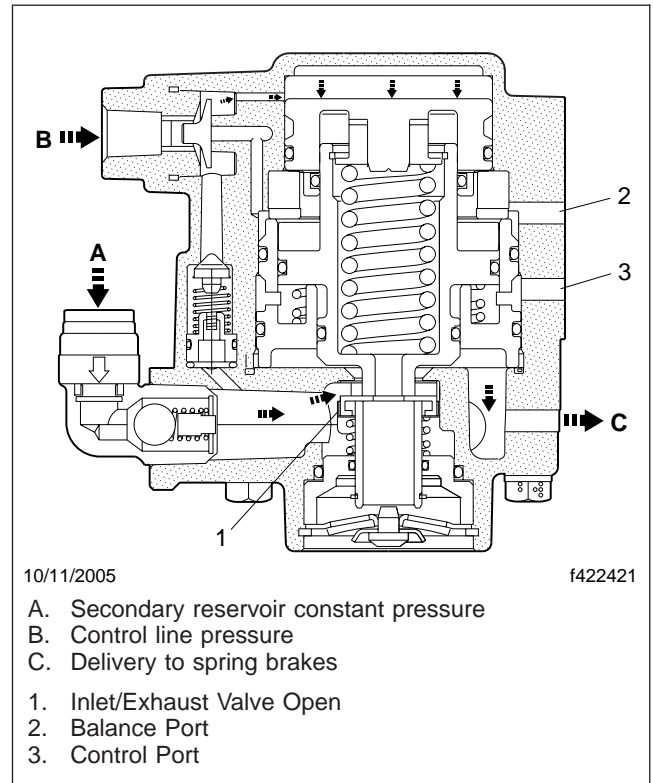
, Charging the Spring Brake Actuators Below 107 psi (737 kPa)
